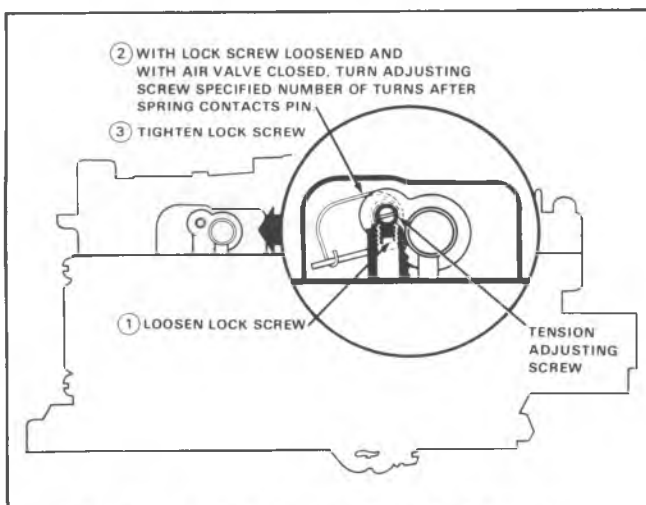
Q--Air Valve Spring Wind-Up Adjustment
